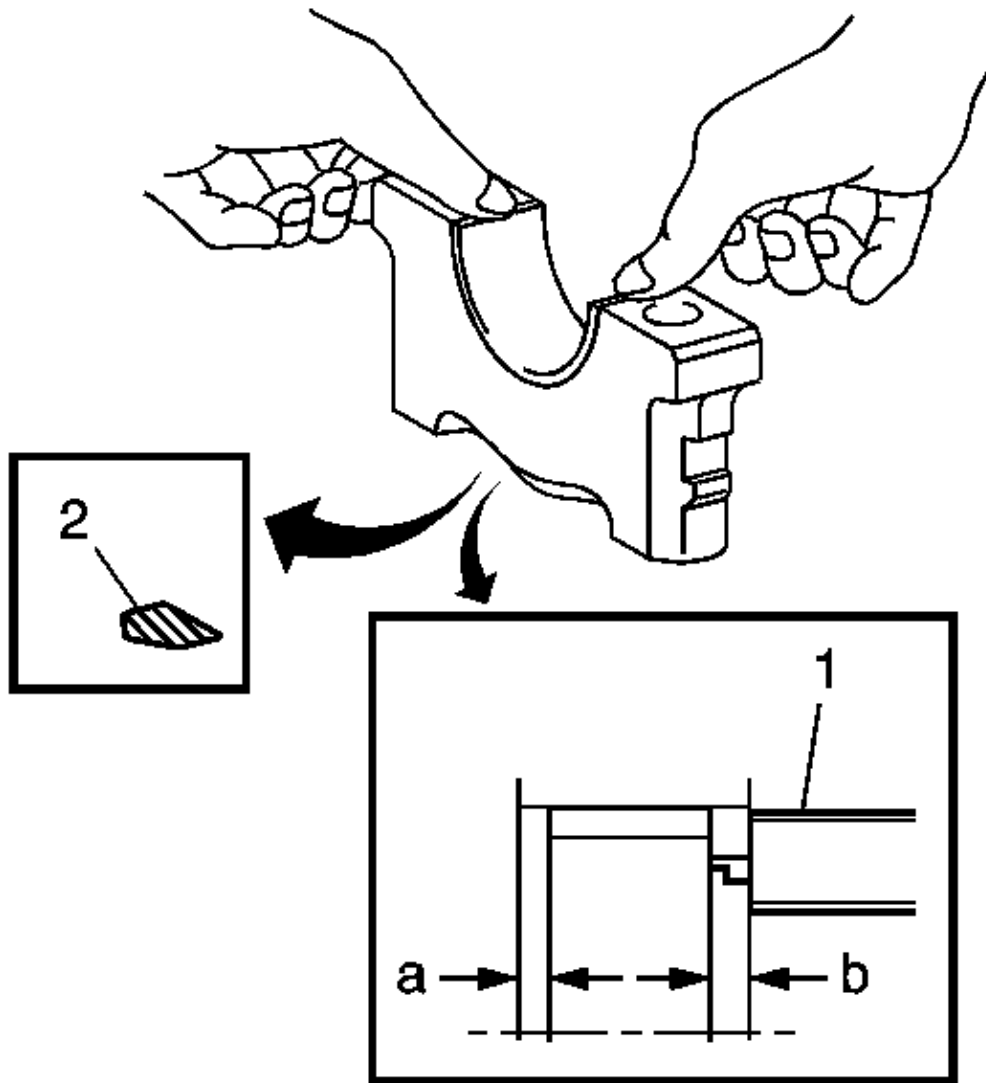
Measuring Distance Between Bearing Cap Edge & Lower Bearing Edge
